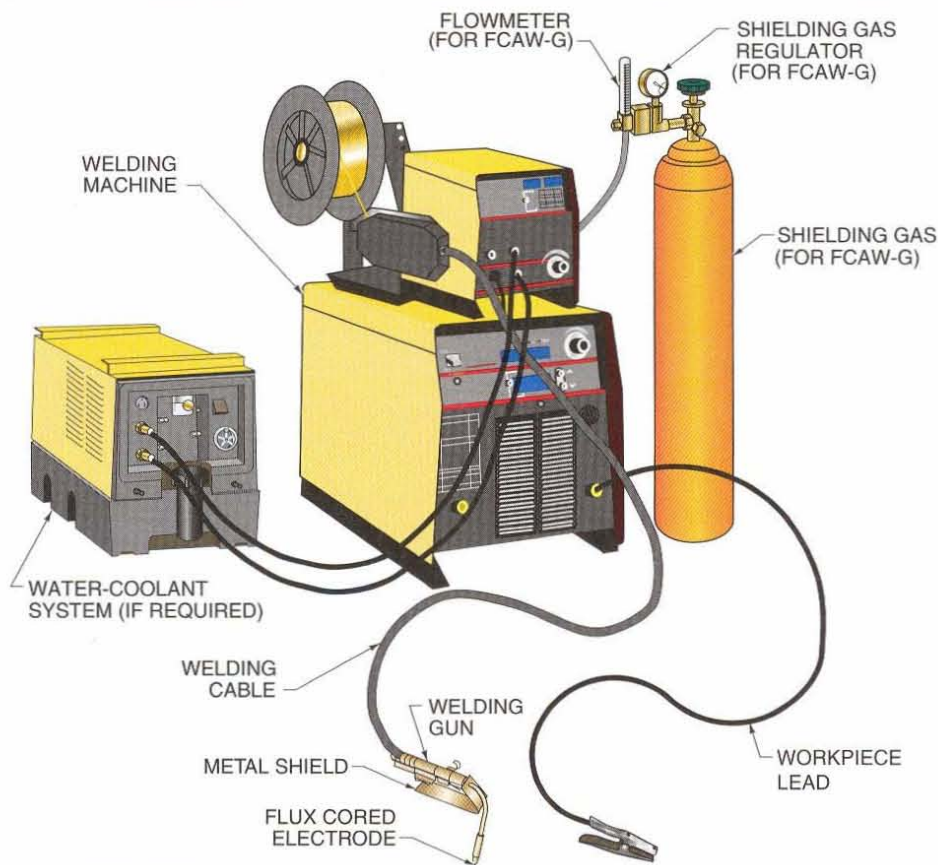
FCAW equipment consists of a DC welding machine, a wire feeder, welding cables, and a welding gun. Additionally, a flowmeter, shielding gas regulator, and shielding gas are required for FCAW-G.
